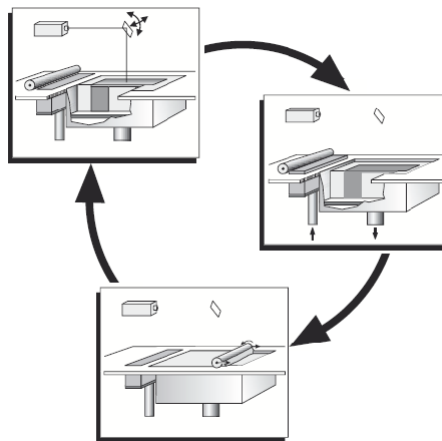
Laser sintering and laser melting; contouring and recoating process [7, p.41]
